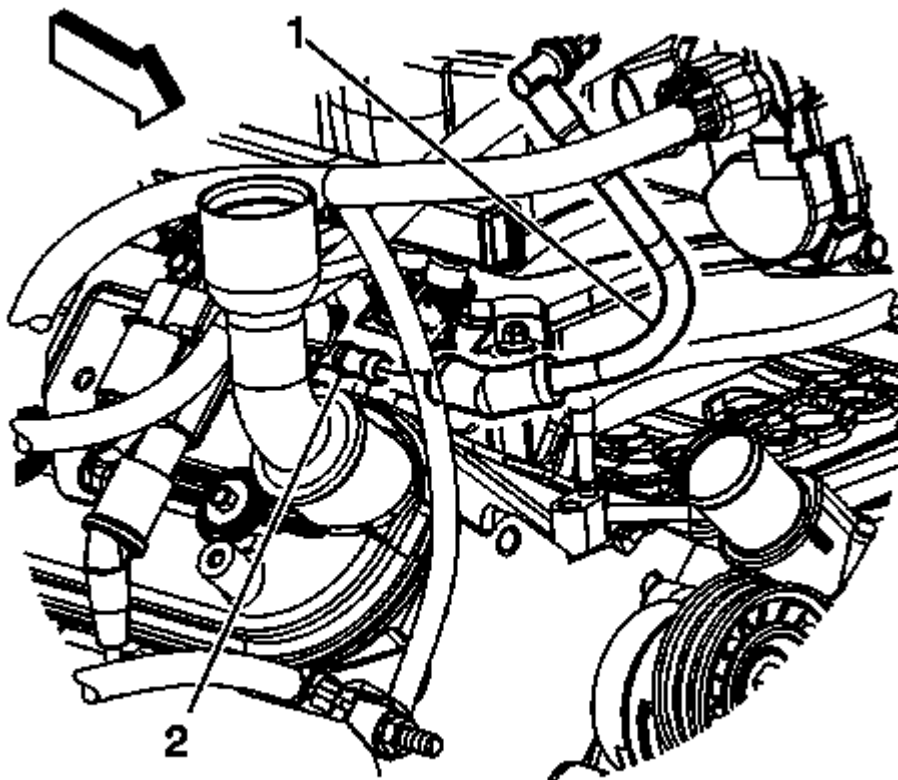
PCV Tube And Right Valve Rocker Arm Cover Fitting
